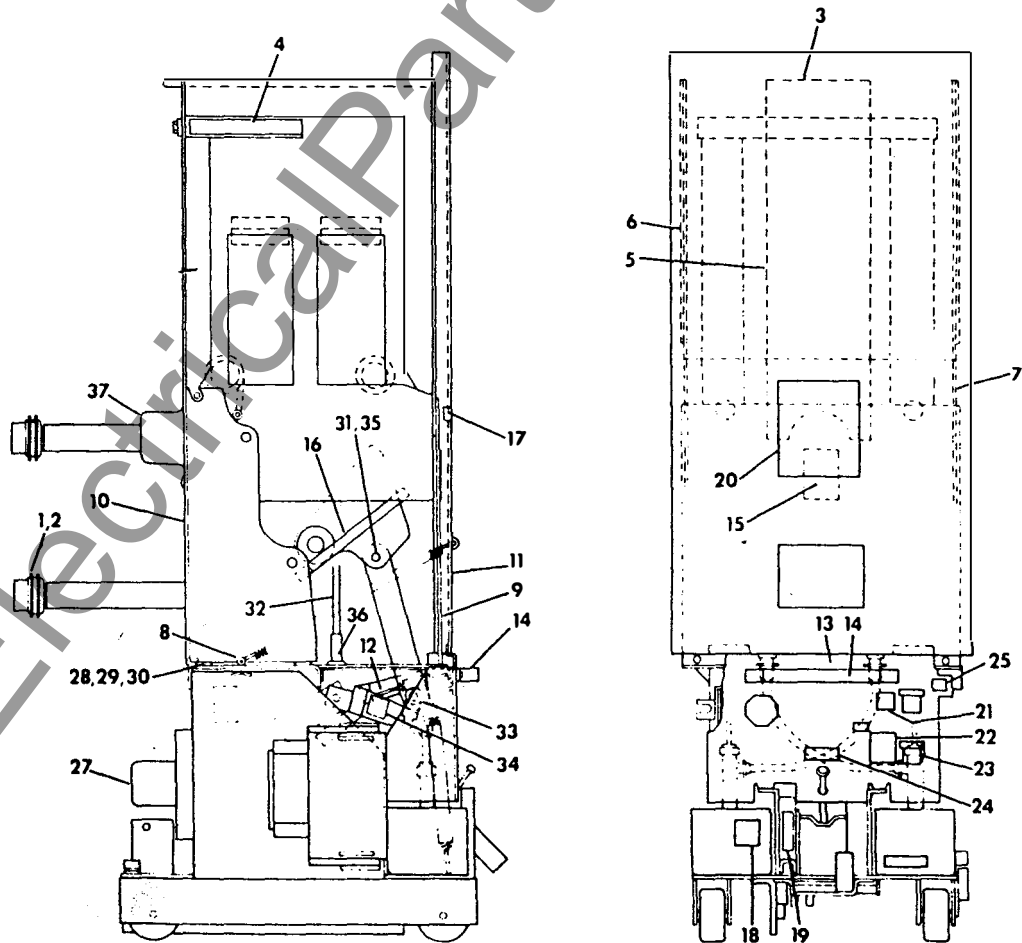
Type MA-75C and MA-250C Solenoid Operated Breaker Assembly - Code A thru F (See Code Table, page ii)
